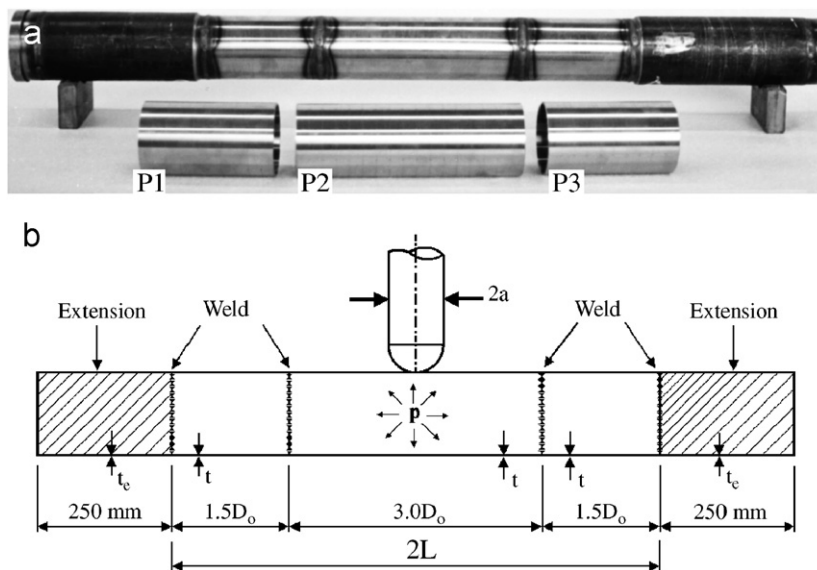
View of three machined pipe parts P1, P2 and P3. Also, photograph of a test model after welding of P1, P2, P3 and two end extensions (a). Sketch depicting dimensions and mid-span application of transverse indenter (b).
